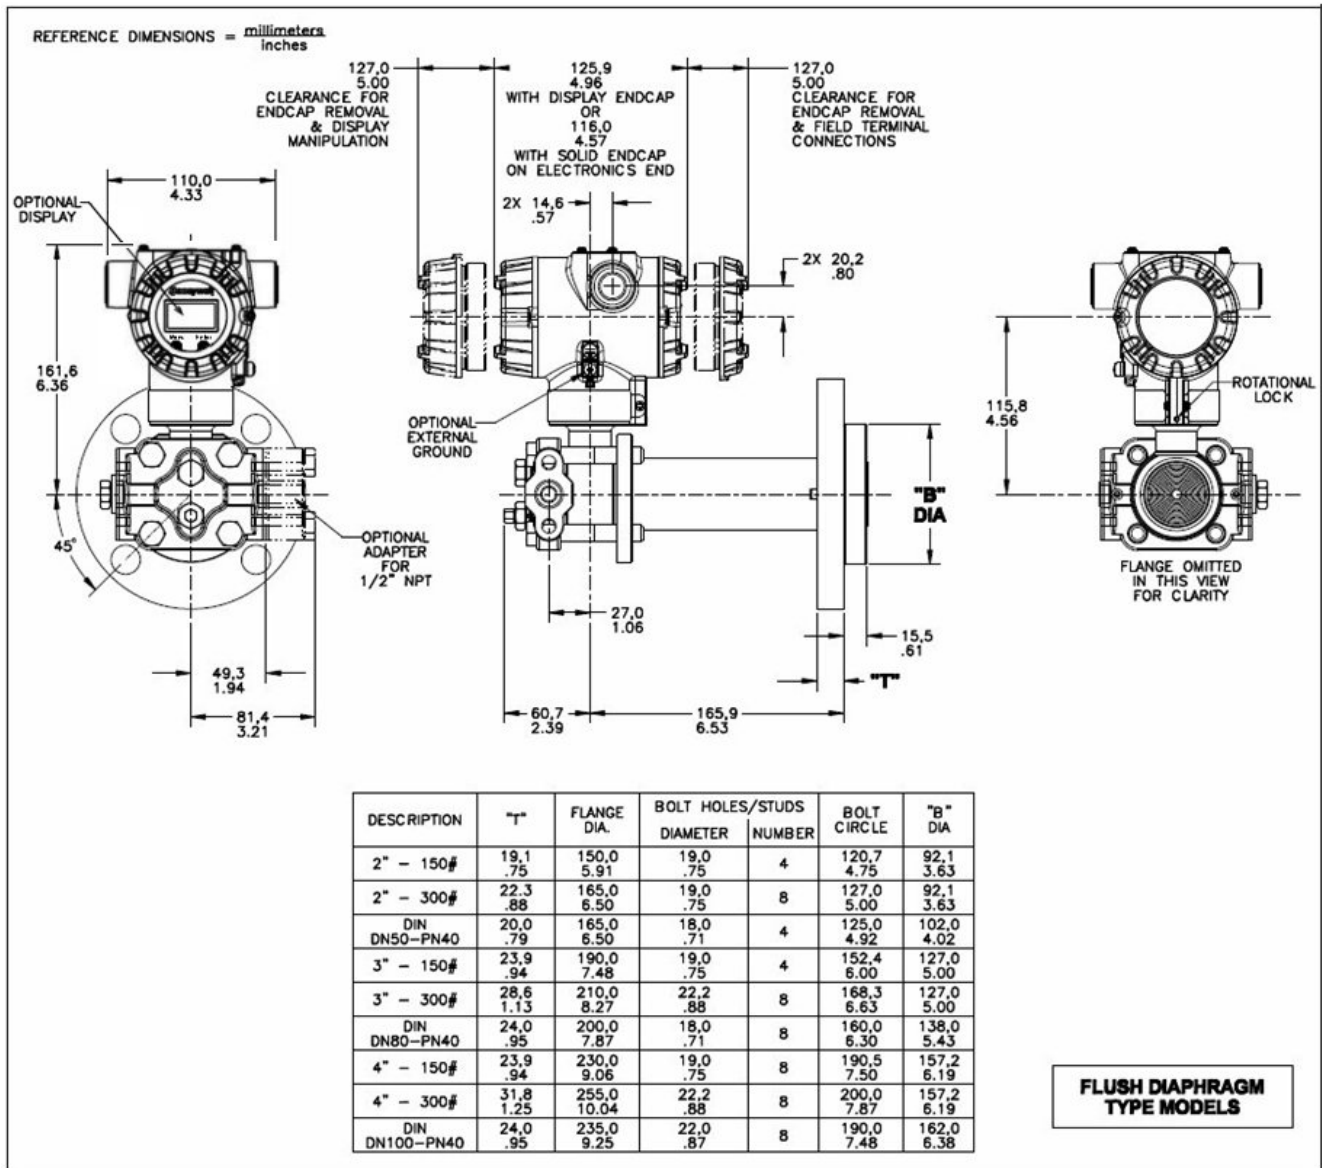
Typical mounting dimensions for flush diaphragm type models STF725 and STF735.
